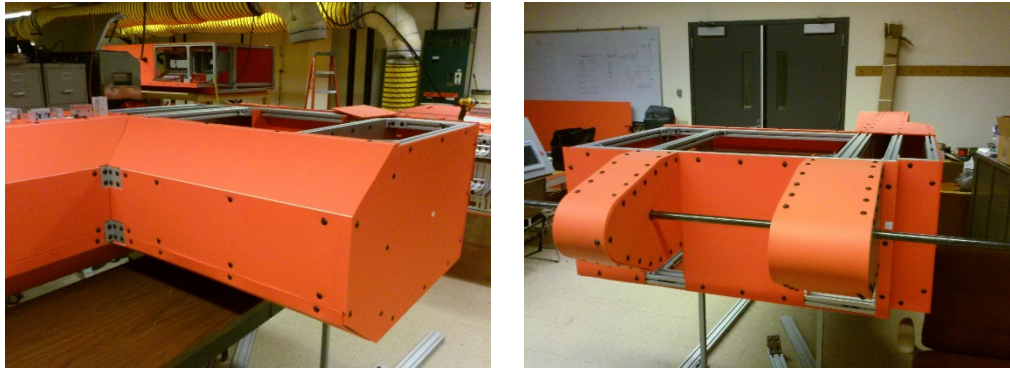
A quarter inch thick PVC sheets being out to generate the outer skin of the shearer.
